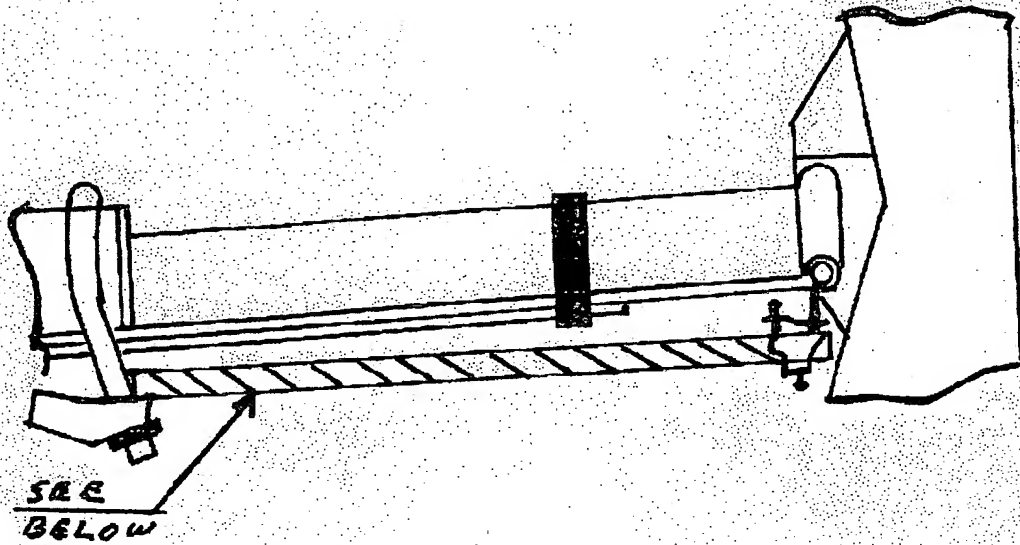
CHECKING SPRING BUSHING TO "U" BOLT
